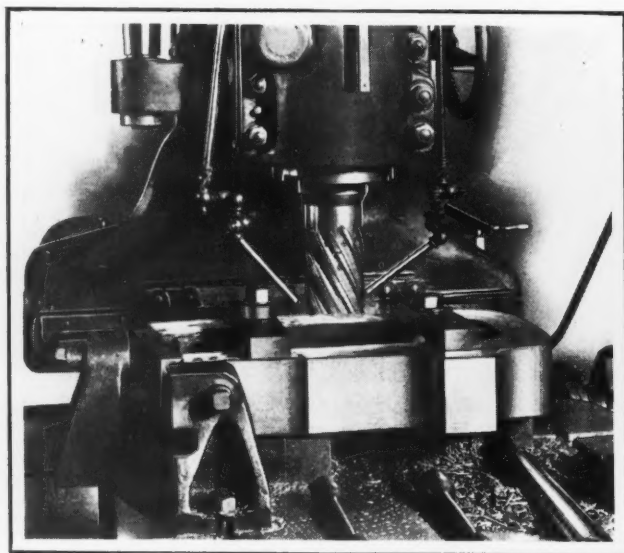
Milling the Contour of a Large Main-rod Strap on a Vertical-spindle Machine
